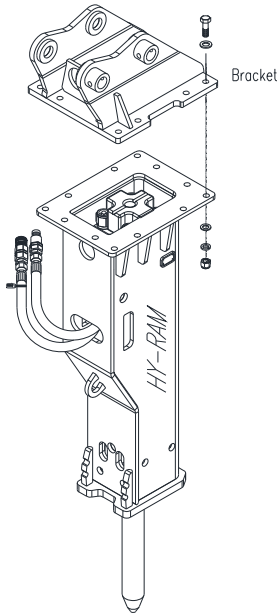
Housing Box, Mounting Bracket & Bolt Set
